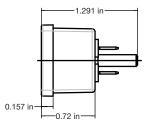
Rectangle-Shaped Hour Meter Dimensions
